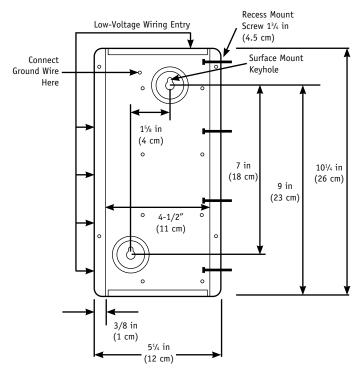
Dimensions and Mounting (HWI-ENC-CC)
